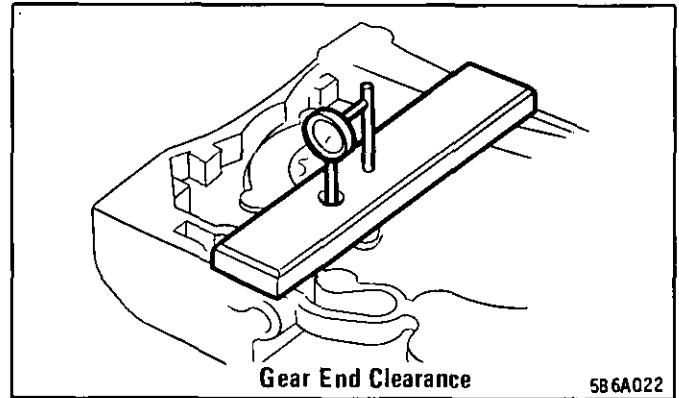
Gear End Clearance (Gear Drop In Housing) -Gerotor
